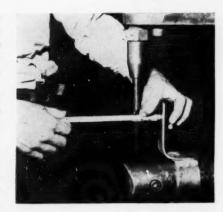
Small pointer held in operator's left hand had to be spot welded to tubing in right hand. Lower electrode is inside tubing, held in place by clamp-like fitting. Micarda block below tubing supports electrode.
